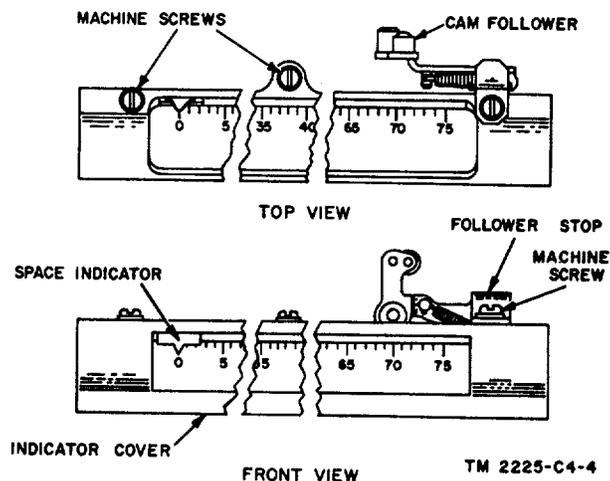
Indicator cover alignment and cam follower stop adjustment.
